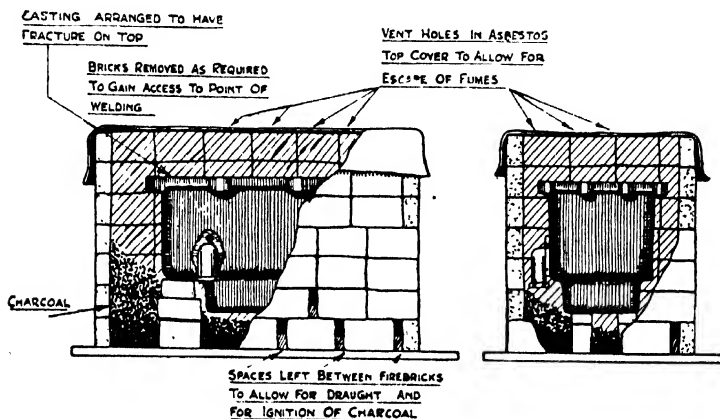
METHOD OF BUILDING A TEMPORARY CHARCOAL FURNACE FOR CAST-IRON WELDING
